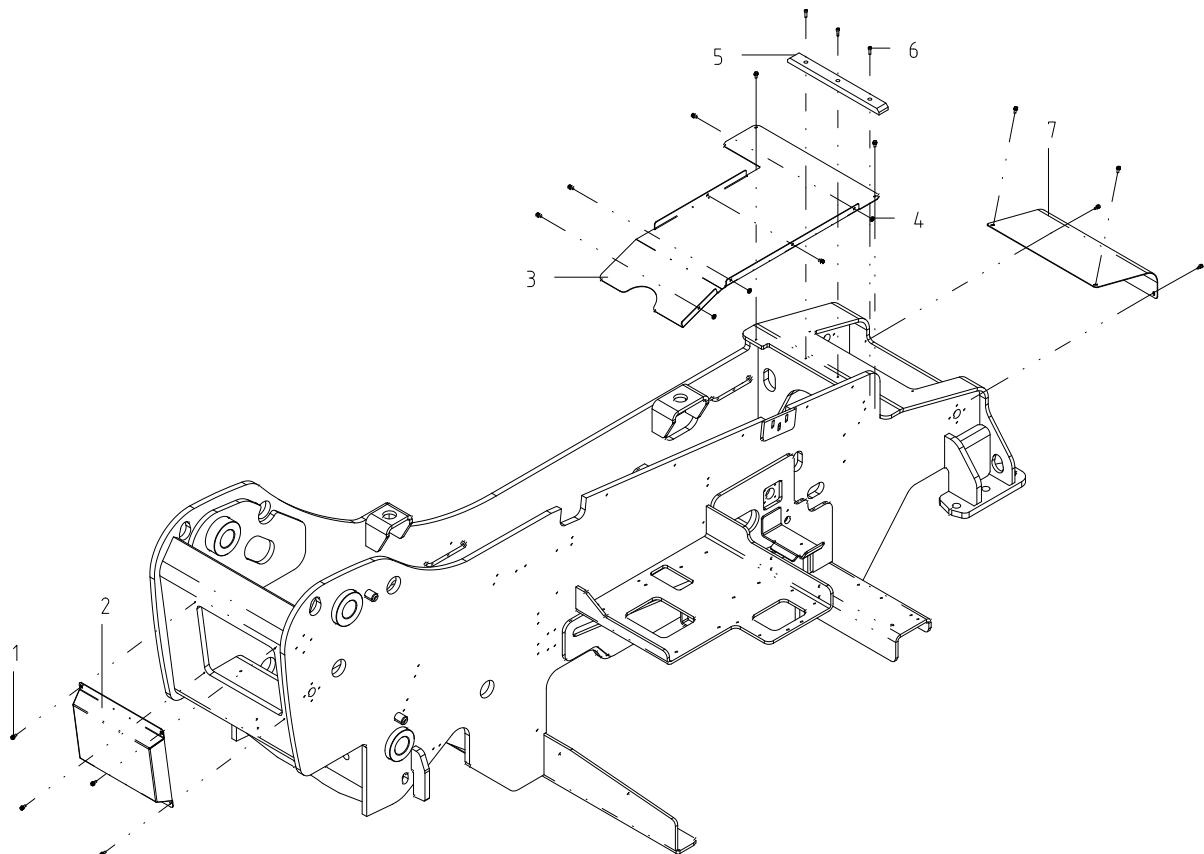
Cover Assembly (T25-60XHYG)
